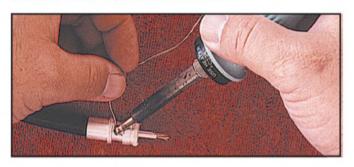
Screw the connector body onto the cable as far as it will go, and solder the shield to the body. When done properly, the molten solder will get sucked into the shield. Solder the center conductor to the center pin, and trim the end. File the end smooth if necessary.
